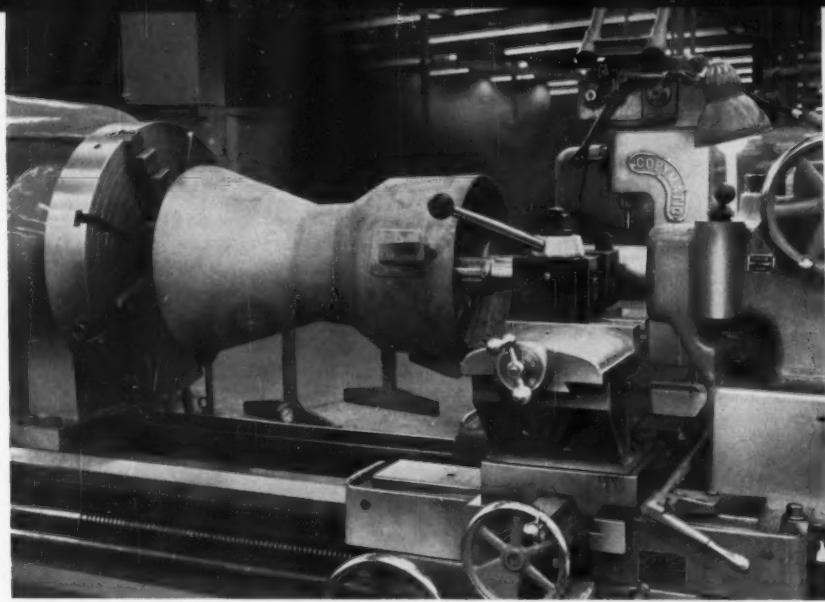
Machining the large-diameter bore of a case assembly on another engine lathe, with the overhanging end supported by an expanding arbor on the tailstock spindle.
